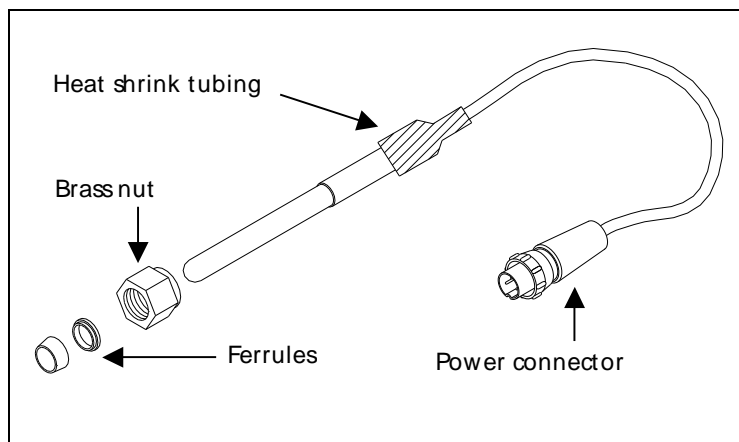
Relative Positioning of Components in the UV Lamp Assembly
